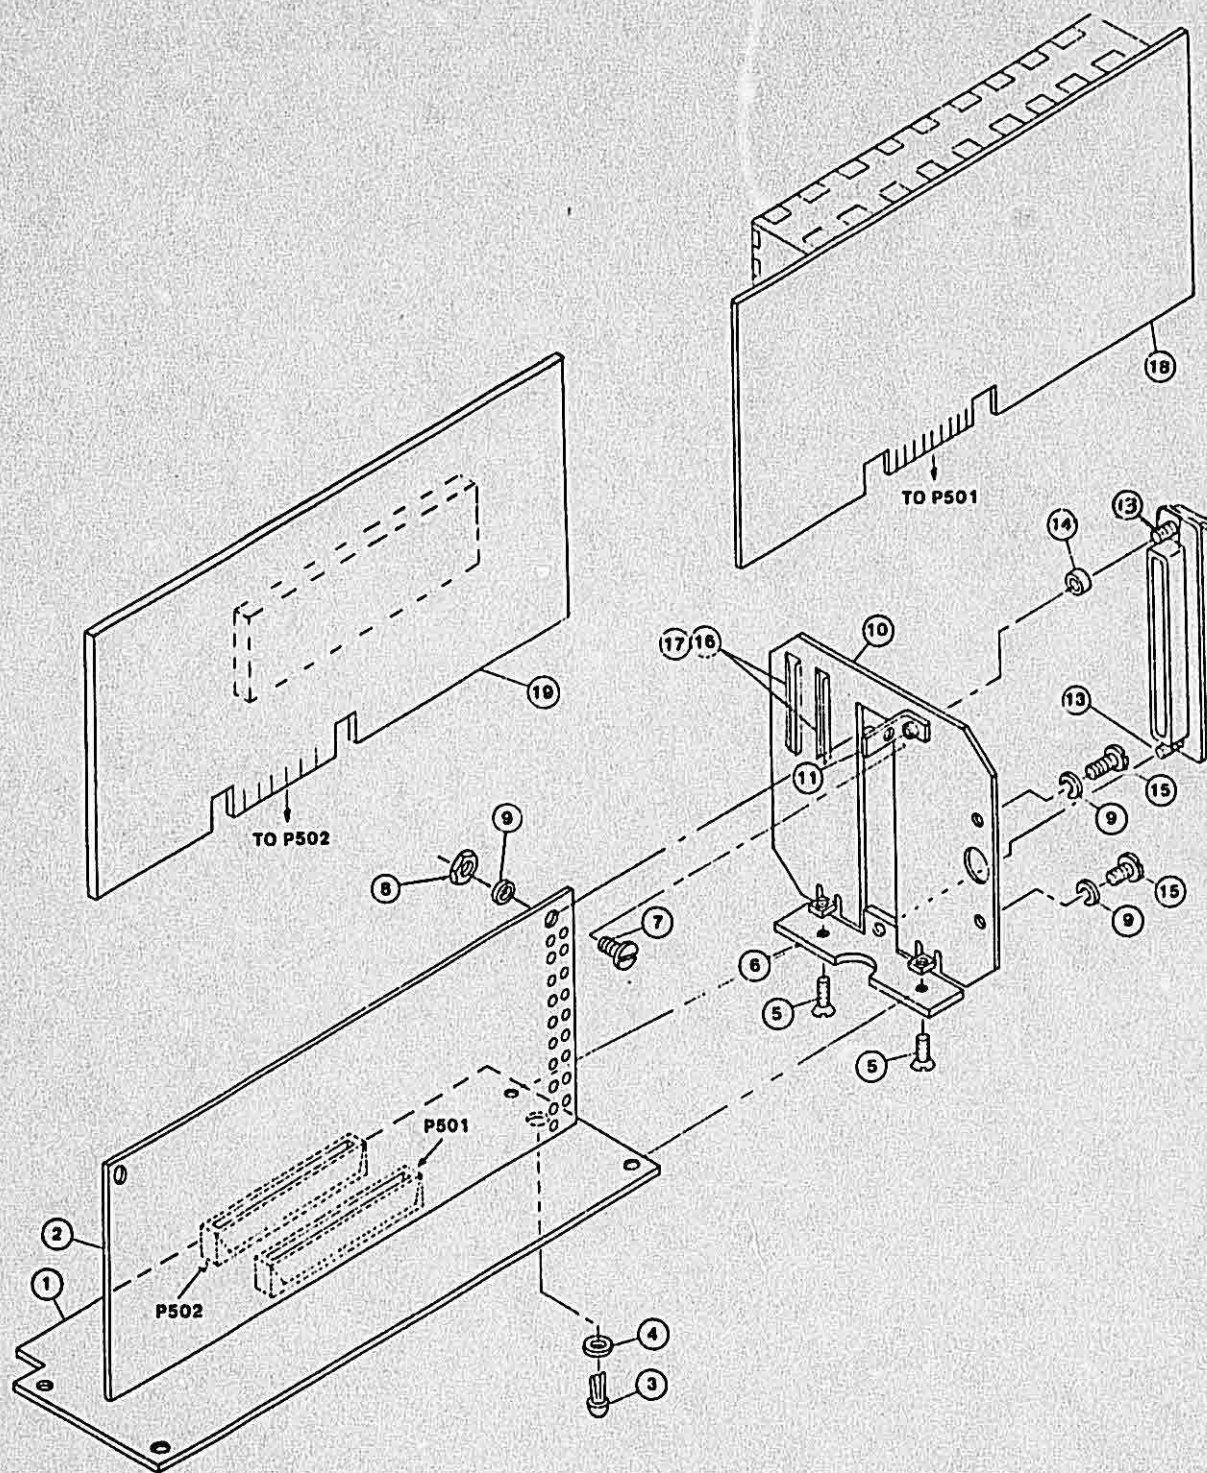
REAR PLATE TO "T" BOARD ASSY.
